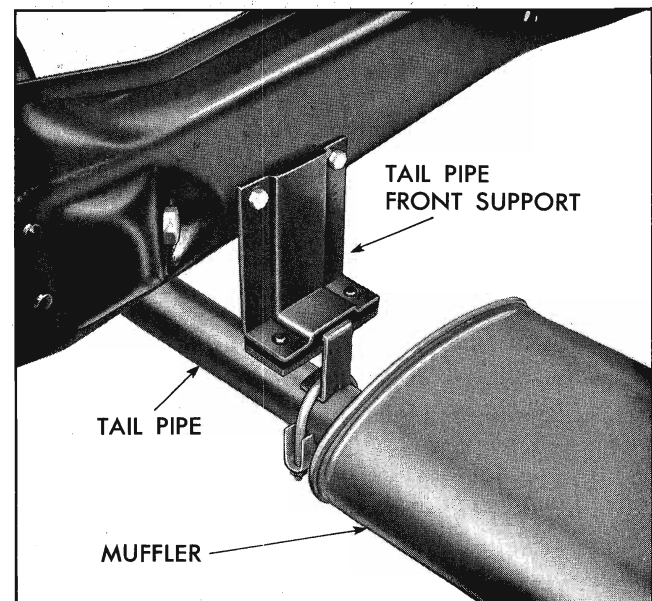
Location of Tail Pipe Front Support Assembly
